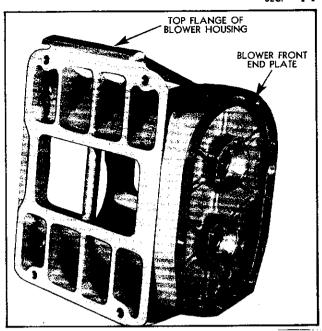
Position of Blower Front End Plate for Engine Models RA, RB, LA, and LB.
